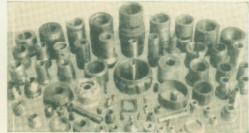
Bushings Made in the 9-inch Jr. Lathe
